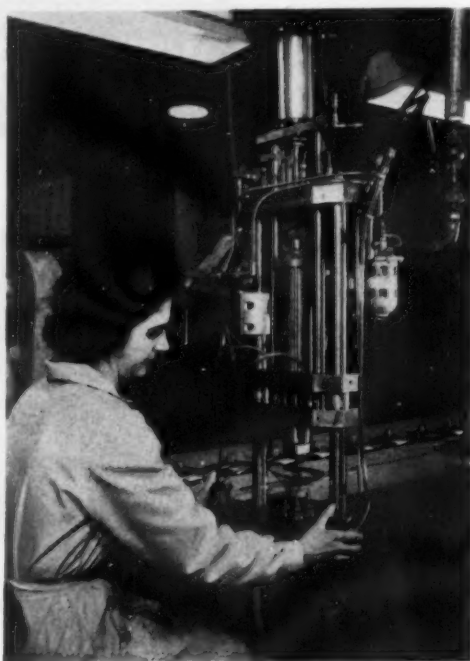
This riveting machine automatically feeds and punches several rivets simultaneously
